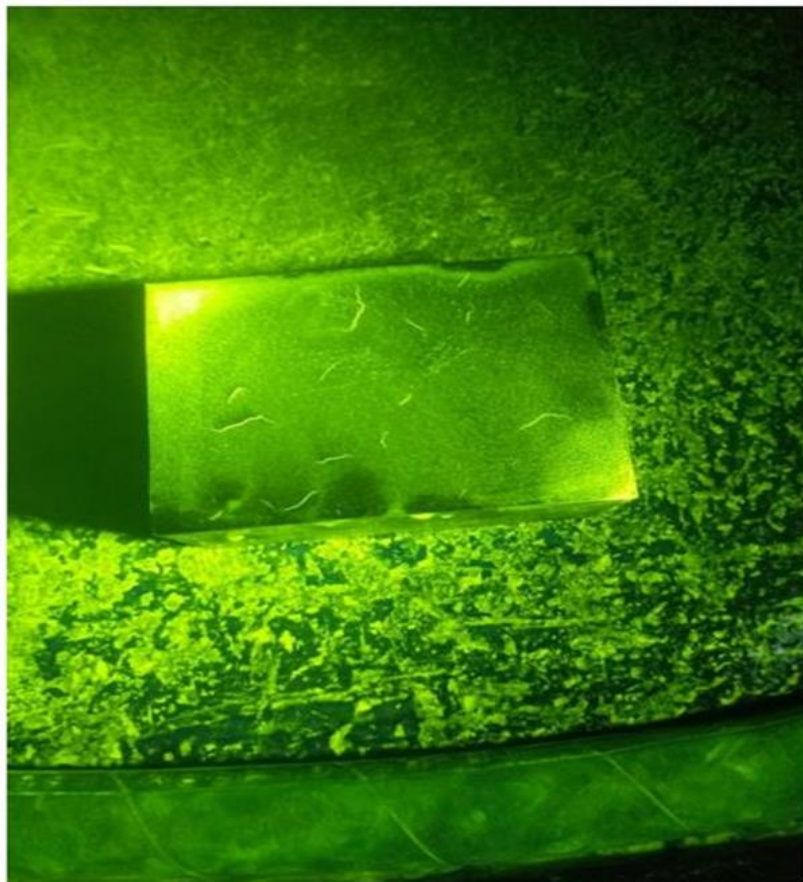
The image of the sample taken from defects area of the casting part.
